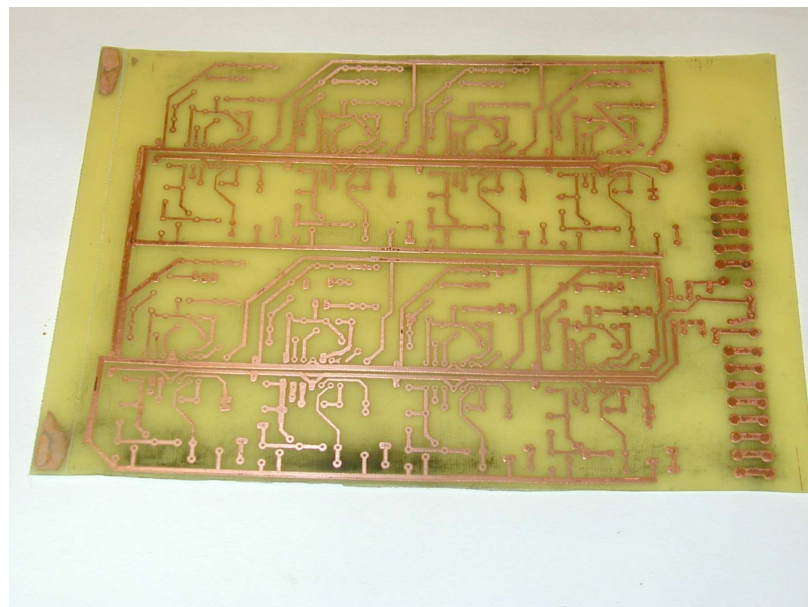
The etched printed circuit board. This board is now ready for drilling. Five large drill holes will be added to accommodate the PCB standoff posts used when mounting the board.
